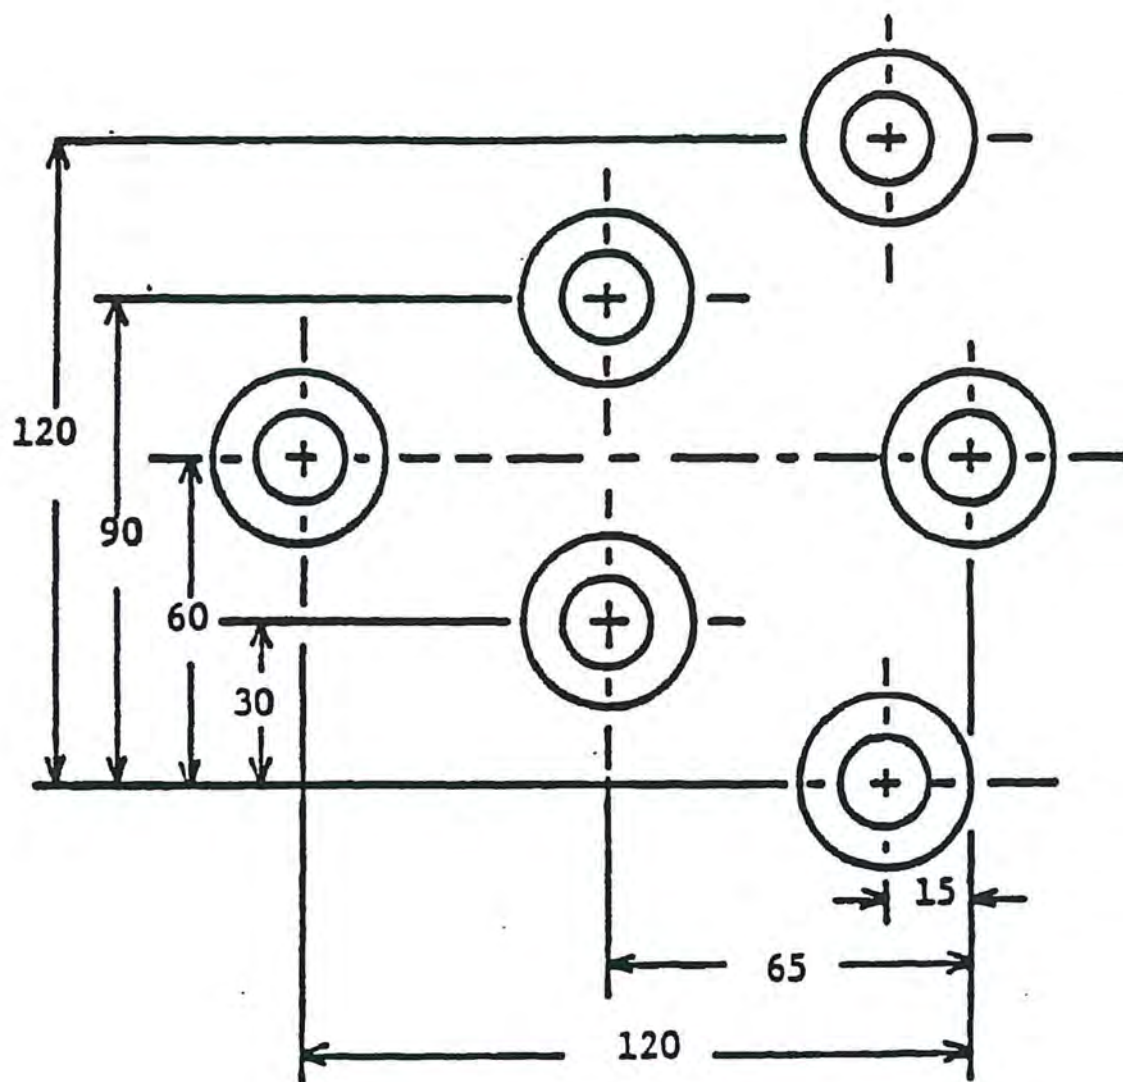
Plan view, propane burners for flammability performance test of a fullface mask, dimensions in millimeters [42 CFR 84.263].
